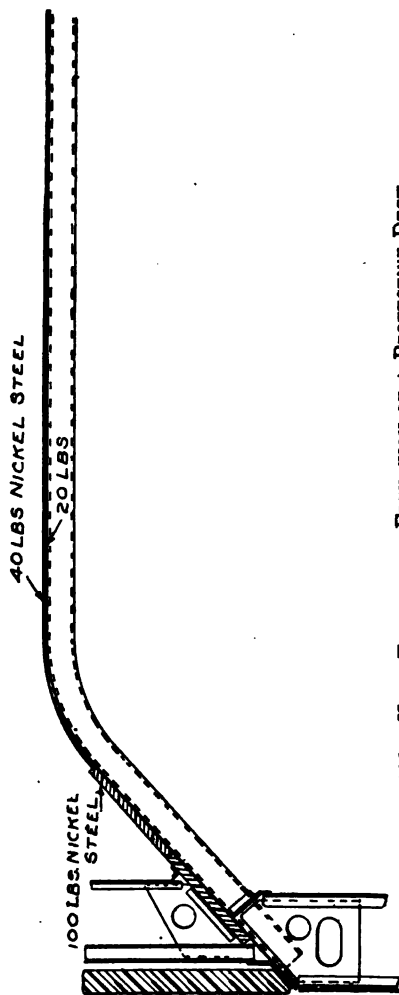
HALF TRANSVERSE ELEVATION OF A PROTECTIVE DECK.
